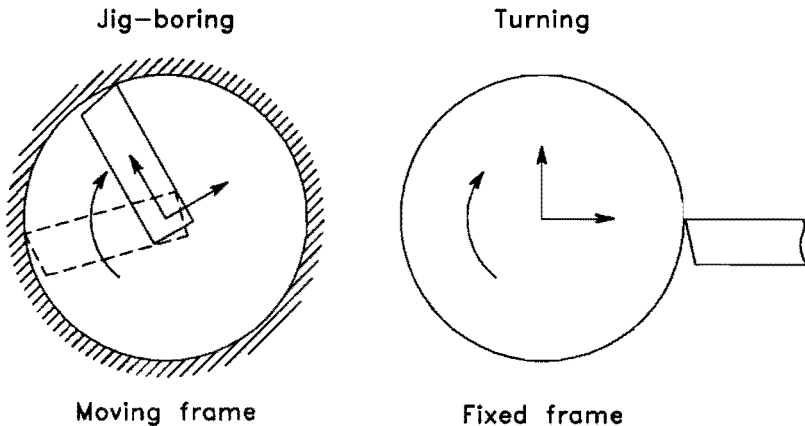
Modelling the spindle errors in jig-boring a hole (moving frame) and in turning (fixed frame).
